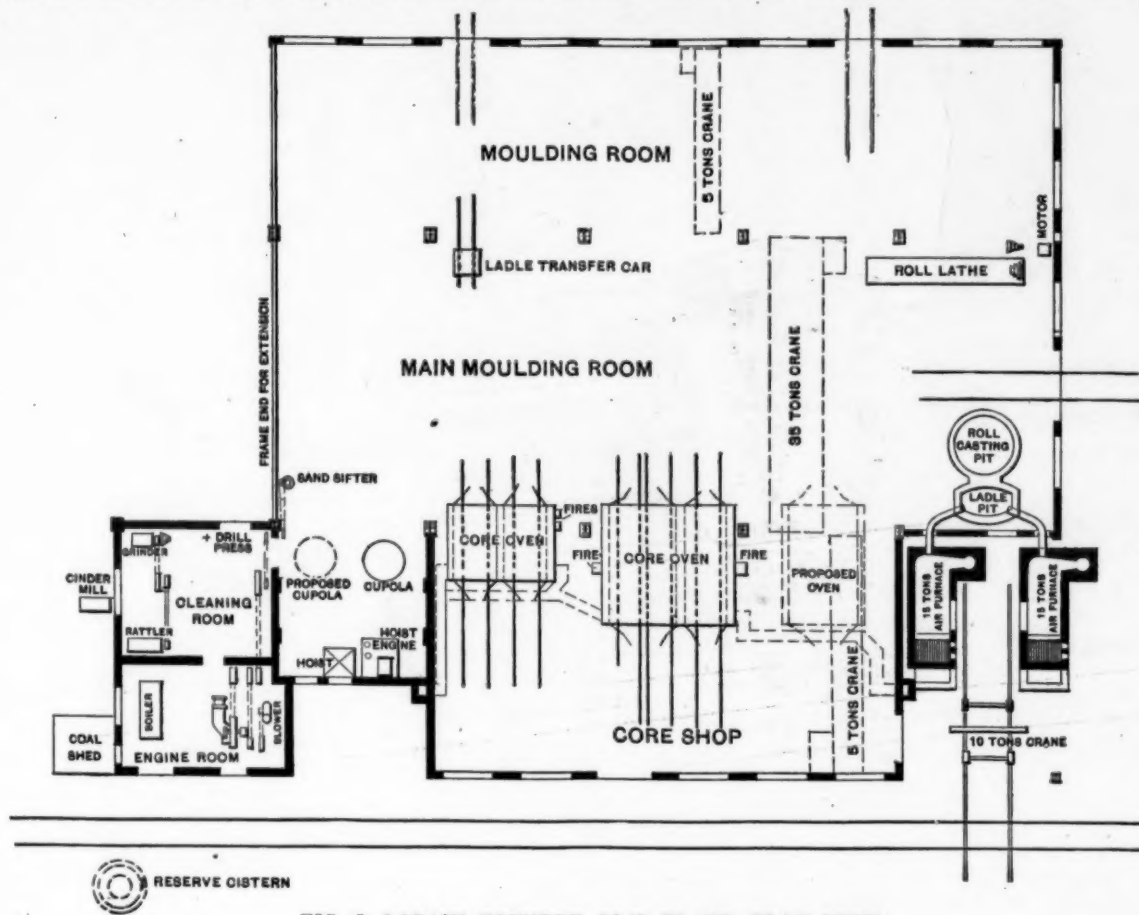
LORAIN FOUNDRY CO.'S PLANT, PLAN VIEW.
